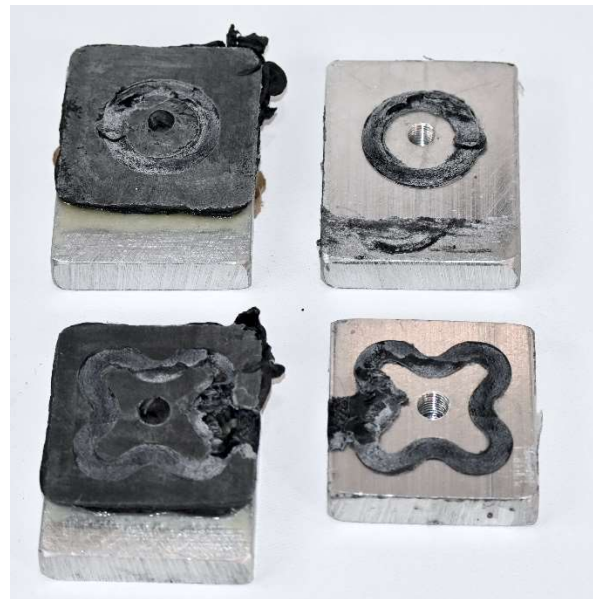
Typical tensile test failure for circular and concave-convex root structures.
